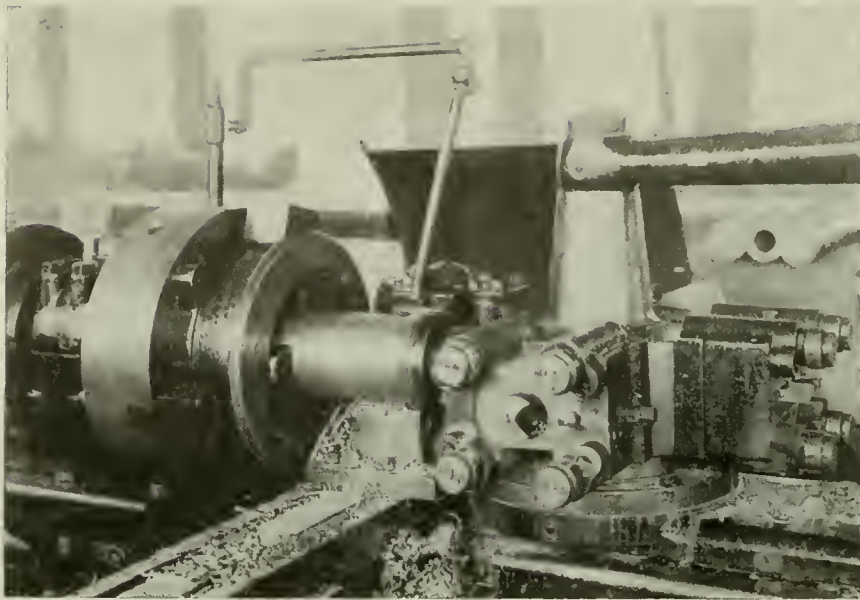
VIEW OF "POTTER & JOHNSTON" AUTOMATIC WHICH RECESSES BASE AND MACHINES DRIVING BAND GROOVE COMPLETE AT ONE SETTING.
